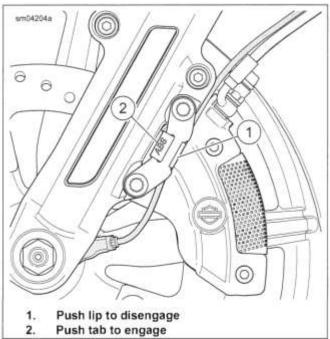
Front Wheel Speed Sensor Cable Clip
